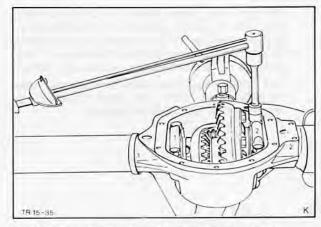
Fit bearing caps (numbered) and torque bolts as specified
